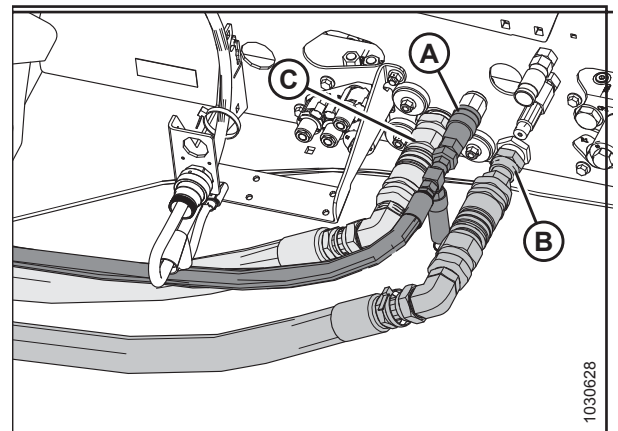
Header Drive Hydraulics – All M1 Configurations using Quick Couplers
